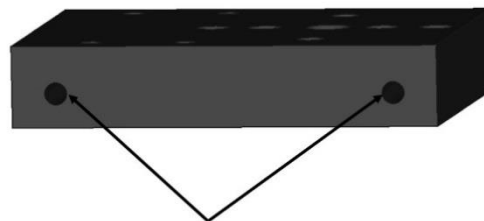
Installation of the adjustable mounting bracket to the base adapter.
